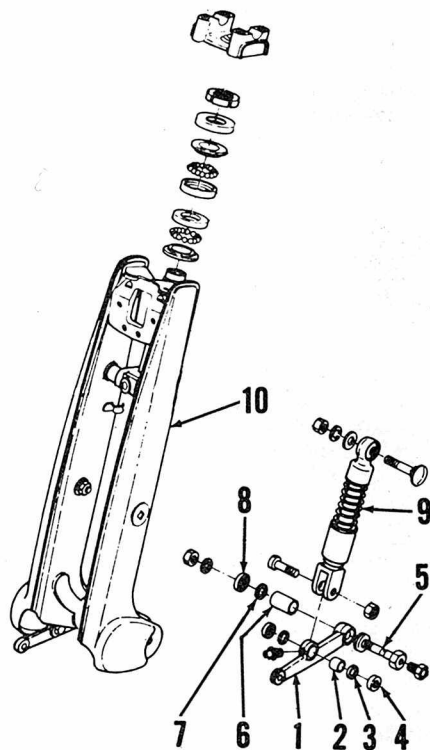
Exploded view of front suspension used on MF-3 and U-5 models.
